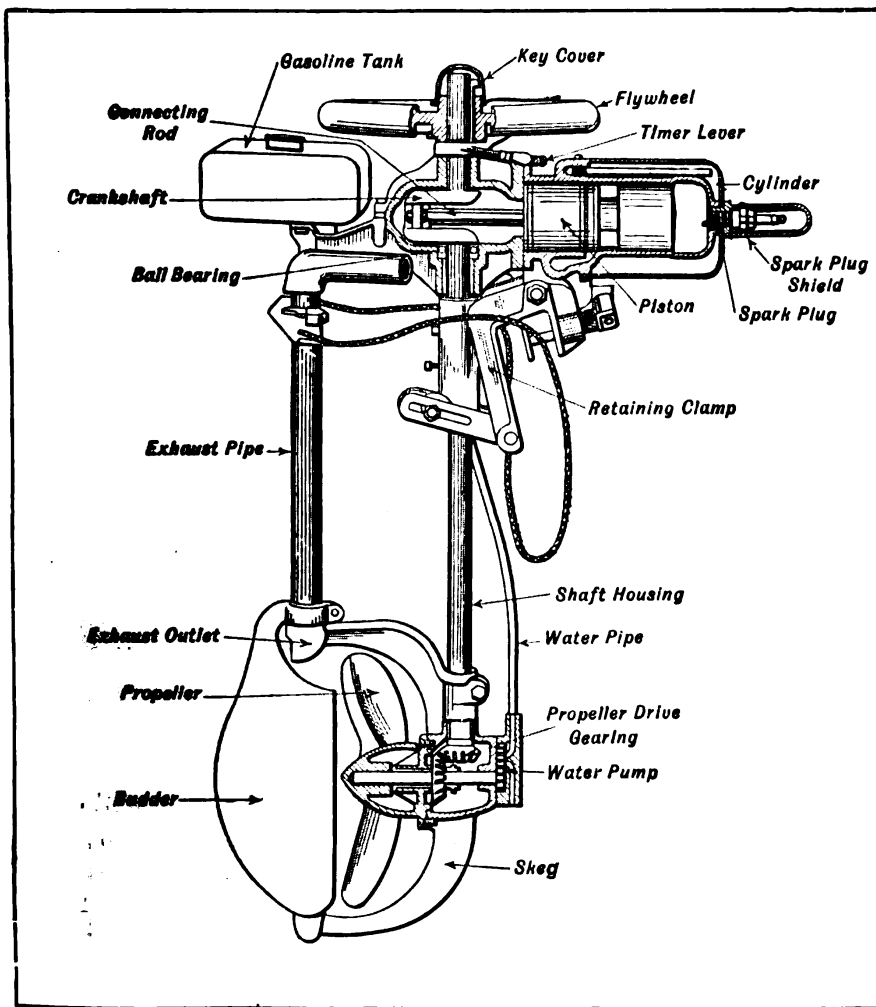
Sectional View Detailing Internal Construction of the Waterman Outboard Motor
